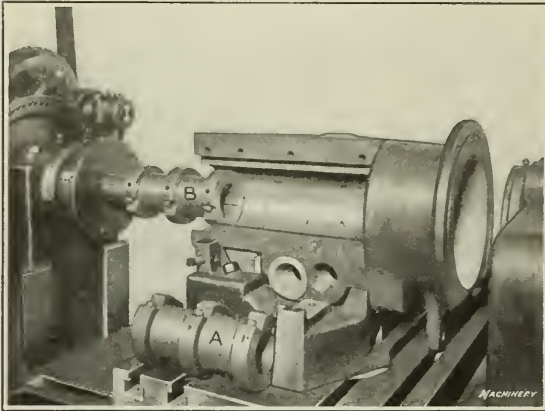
Tools for cutting Oil-grooves in Gear Shaper Saddle
